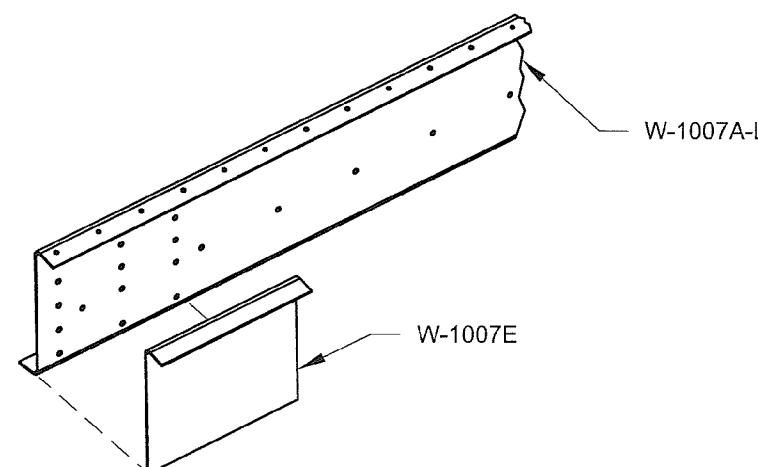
MATCH-DRILLING THE REAR SPAR DOUBLER PLATE
